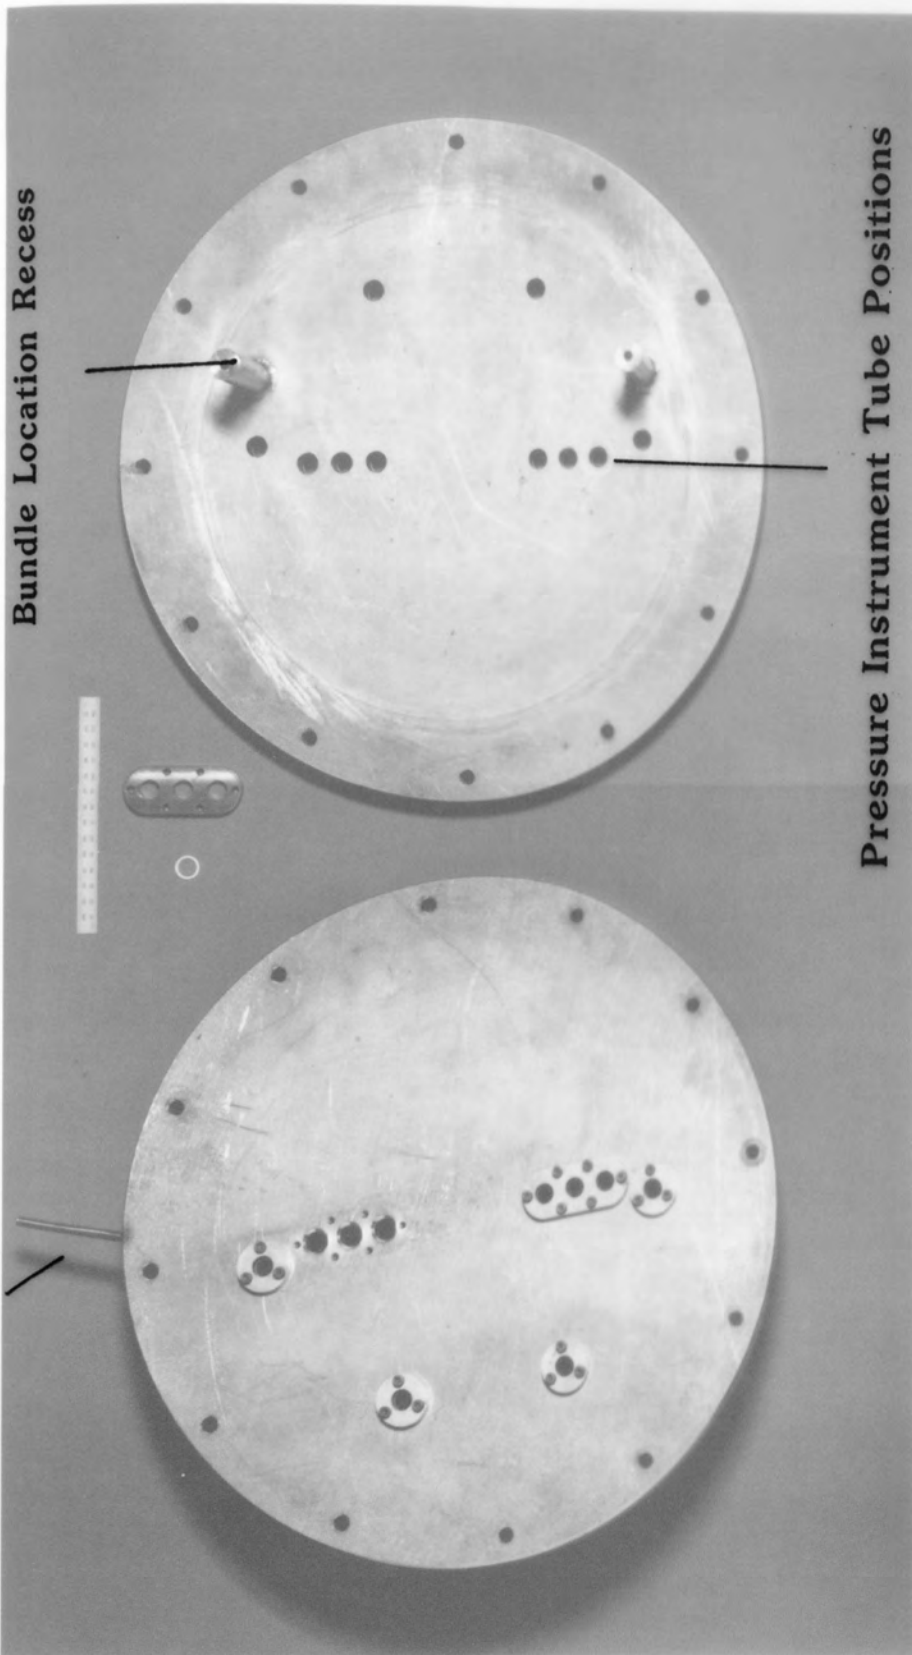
Shell End Plates Showing Rod Bundle Location and Pressure Instrument Tube Positions
